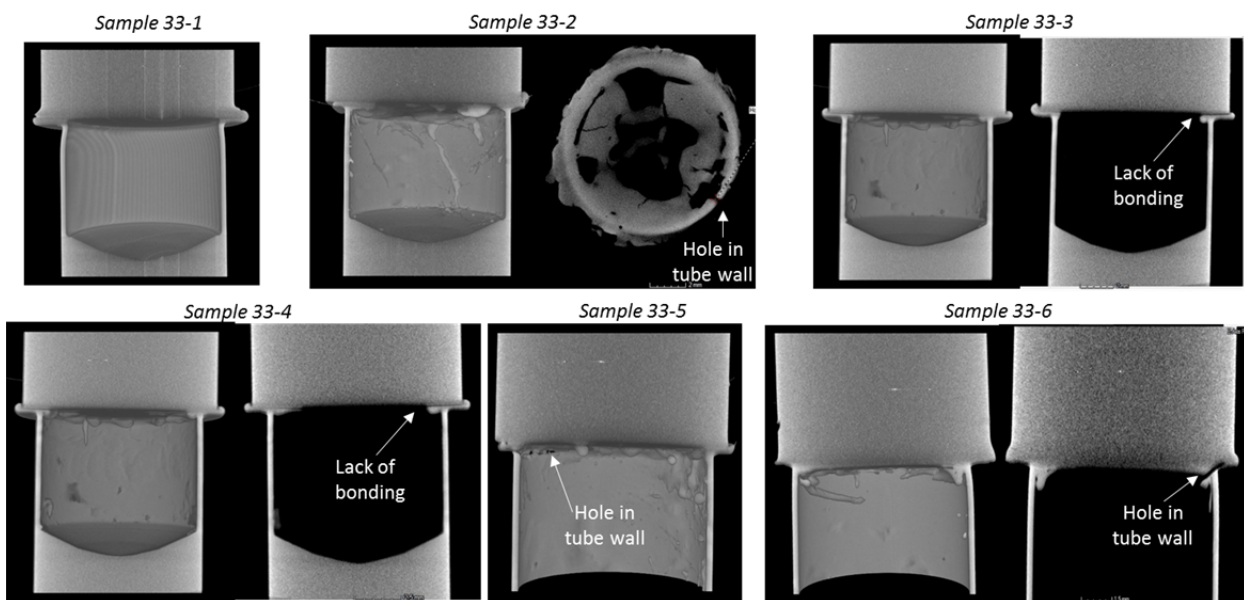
X-ray CT scan of cross sectional view of the weld zone in samples 33-1 through 33-6.
